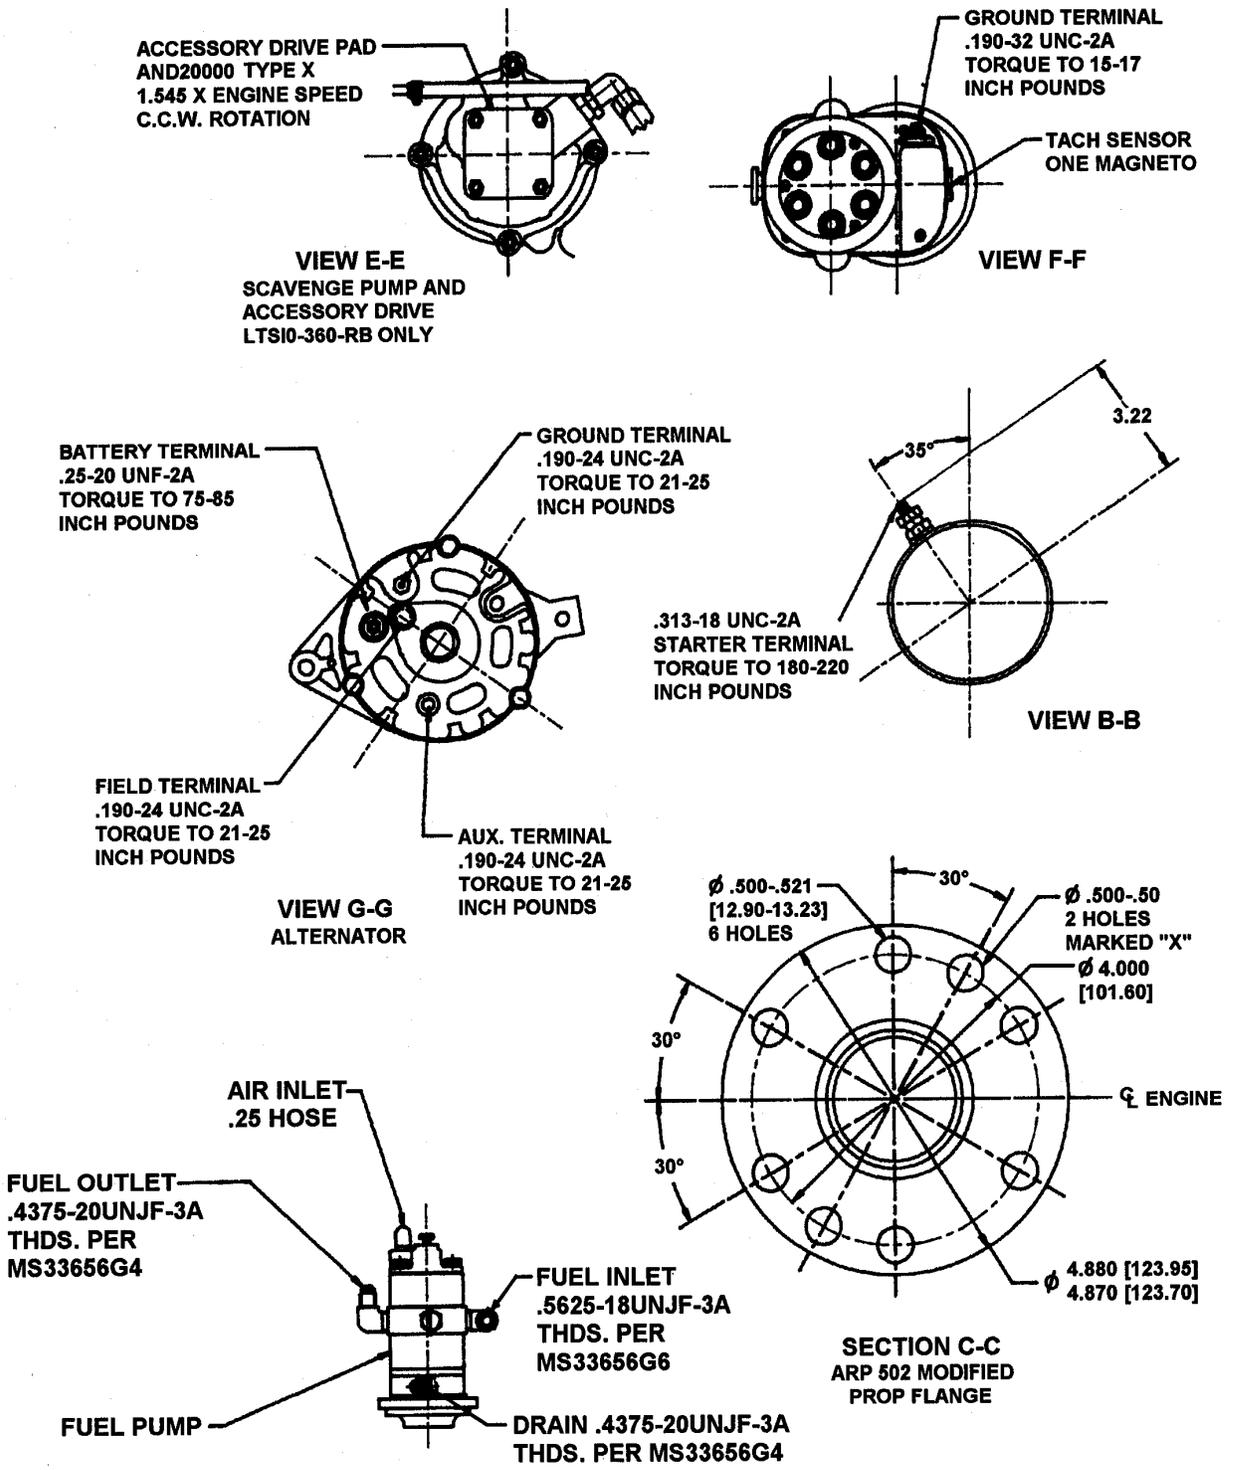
INSTALLATION DRAWING (cont'd)
